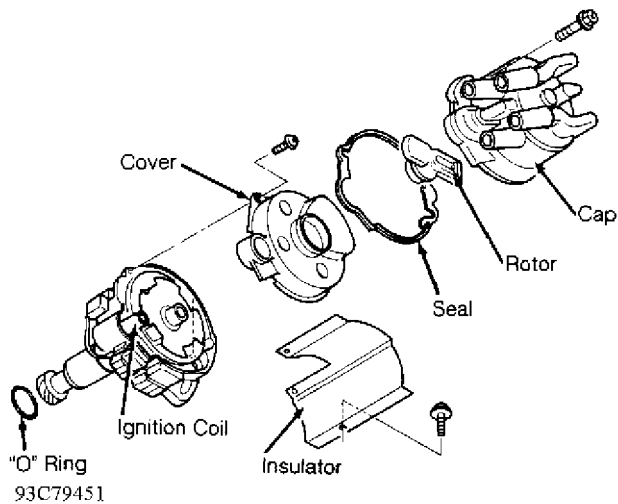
Exploded View Of Distributor (MX-6 2.0L & 626 2.0L)
